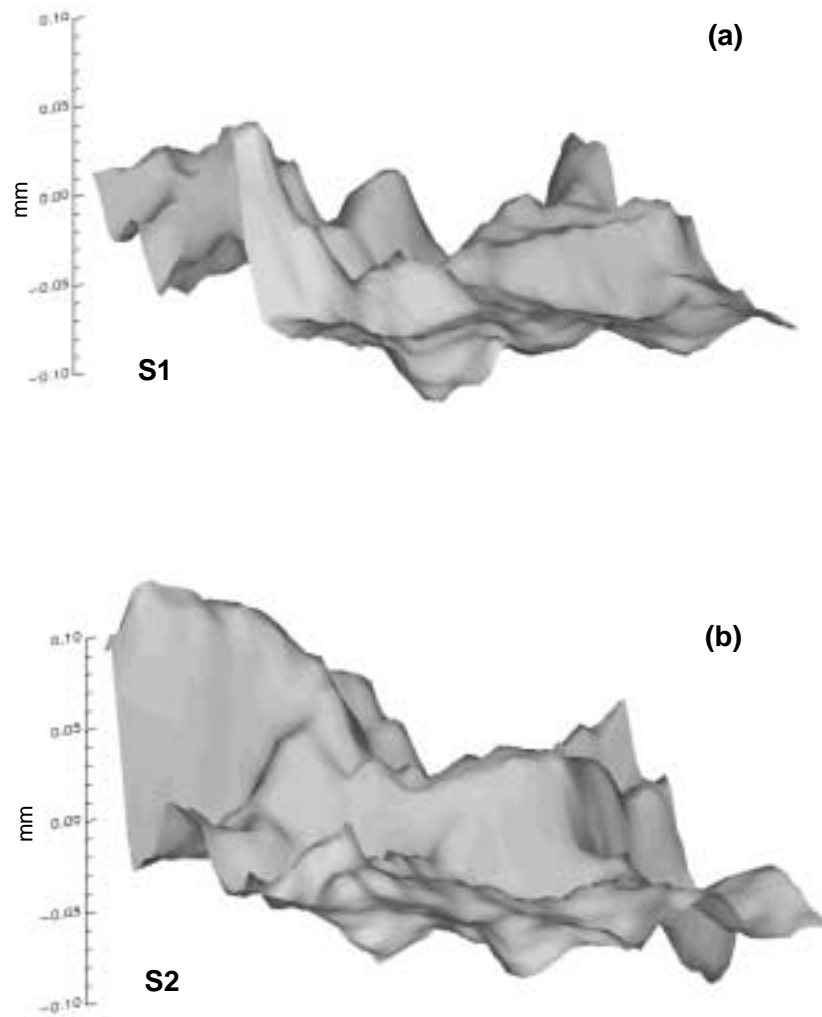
DEMs of the fracture surfaces in Fig. 8. Both specimen halves, side 1 (a) and side 2 (b), are shown.
